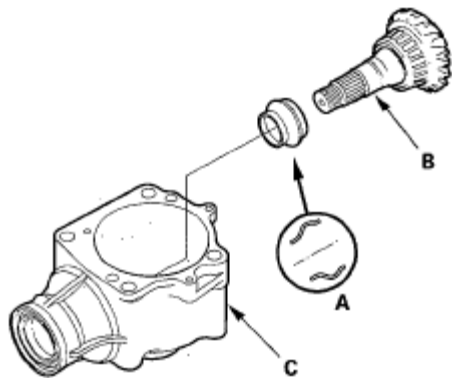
Identifying Transfer Spacer On Transfer Output Shaft
